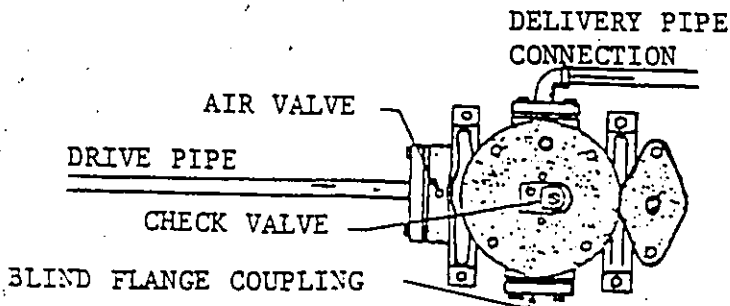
(c) TOP VIEW WITH AIR CHAMBER & WASTE VALVE REMOVED
